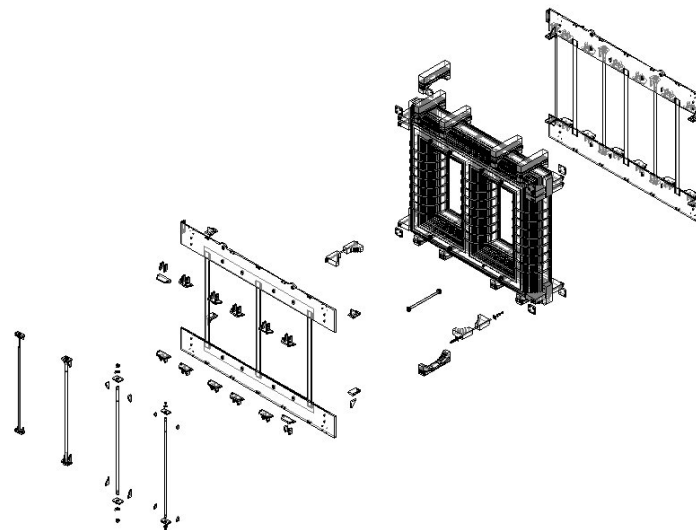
Exploded view of power transformer core (both horizontal and vertical bolt tying)
